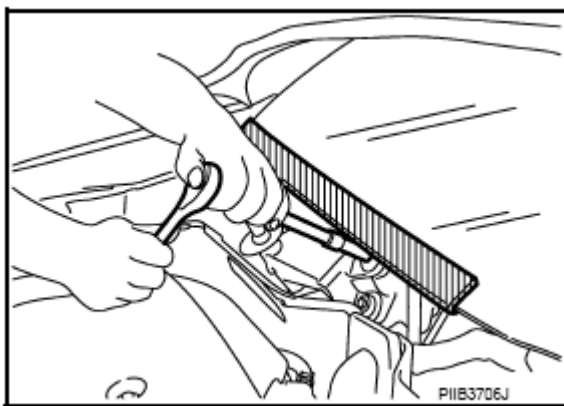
Precaution For Covering Lower End Of Windshield With Urethane After Removing Cowl Top Cover
